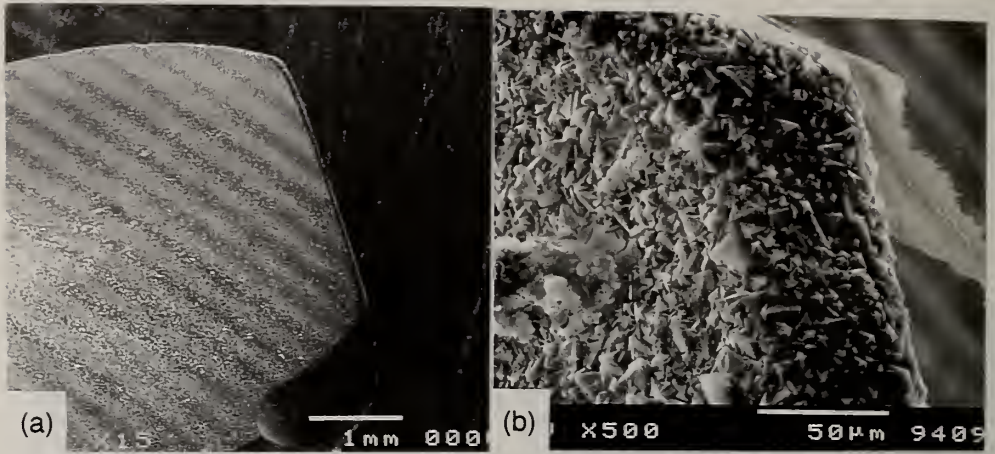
Scanning electron micrographs of diamond-coated twist drills after making 7000 holes : (a) Low magnification, (b) Enlarged view showing no wear.
